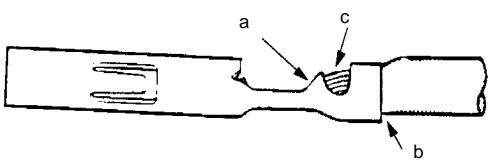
Examples of faults with crimped contacts – End feed contacts (length feed contacts)
